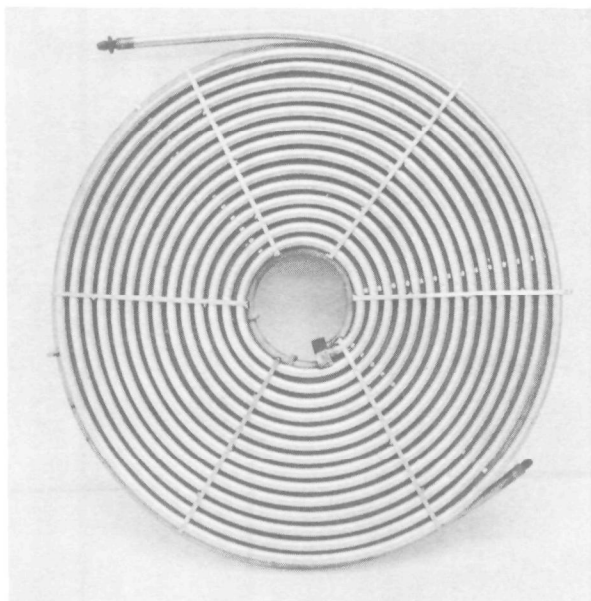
ASSEMBLY OF TWO PREHEATER COILS WITH SPECIAL CONNECTOR WELDED AT INSIDE OF COILS
